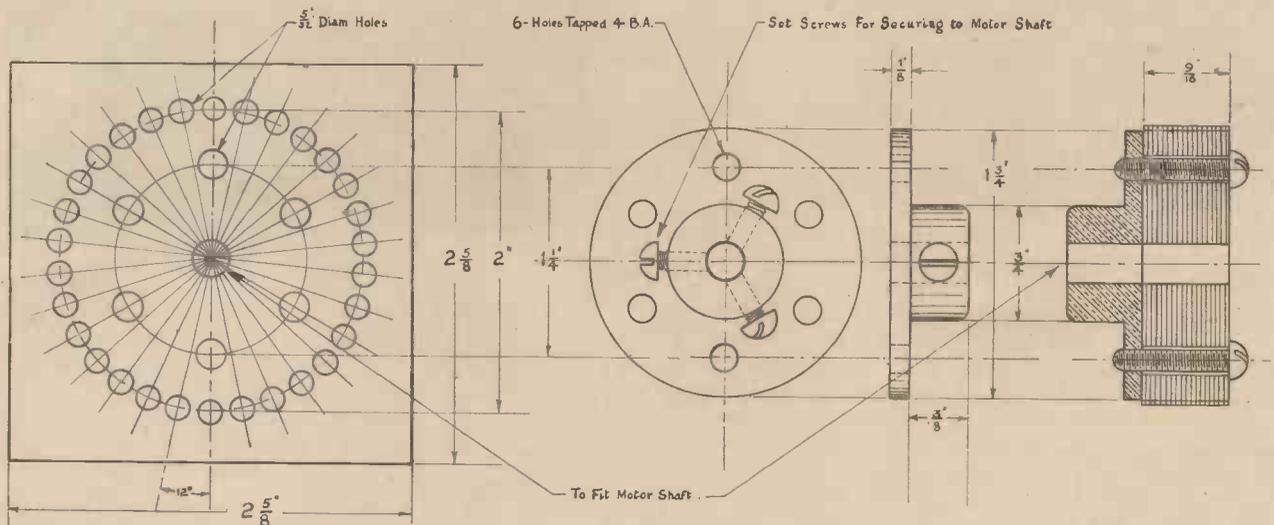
Complete details for marking out the individual pieces of sheet iron which form the toothed-wheel laminations. In addition the assembly of these plates is indicated on the right.
